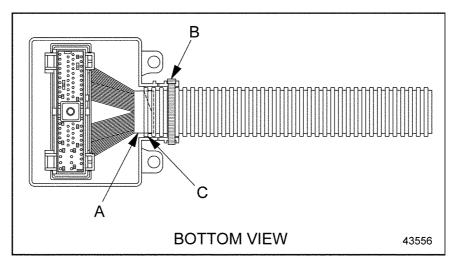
Bottom View of Shroud, ECU Connector and Conduit
